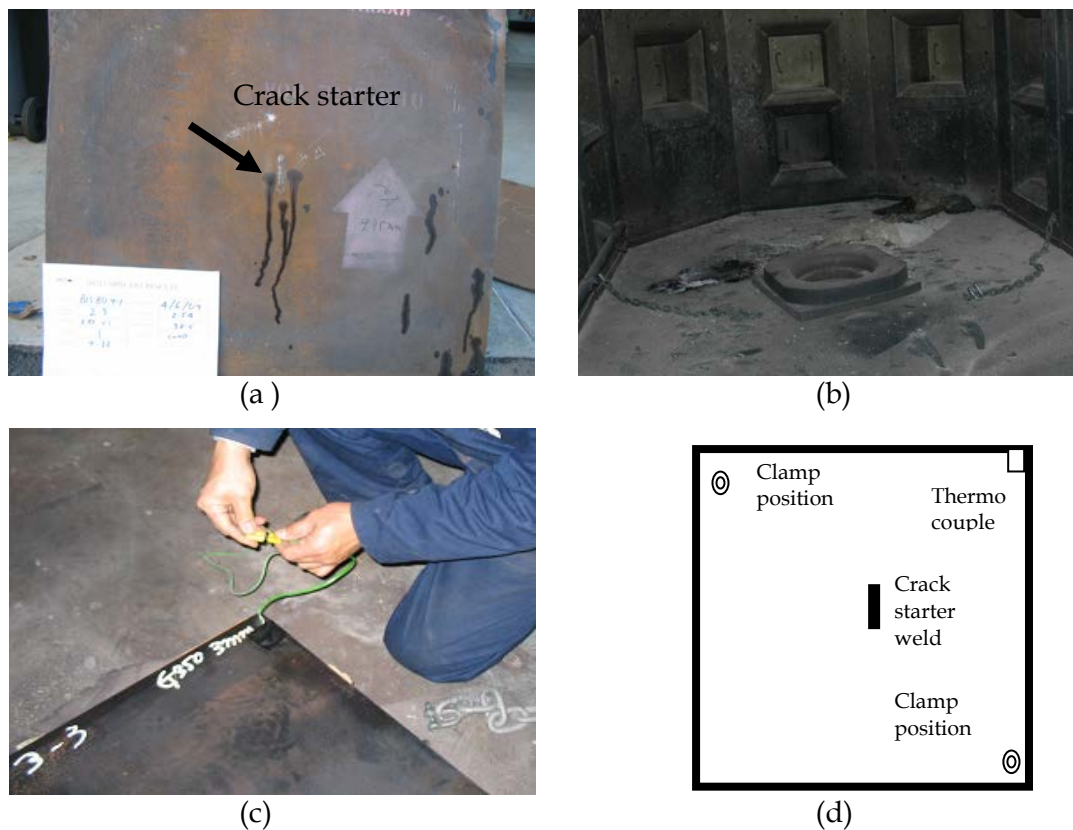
(a) weld bead on the centre of the underside of the plate (arrowed) (b) View of the blast chamber, (c) thermocouple position on the edge of the test plate, and (d) the schematic diagram of the test plate.
